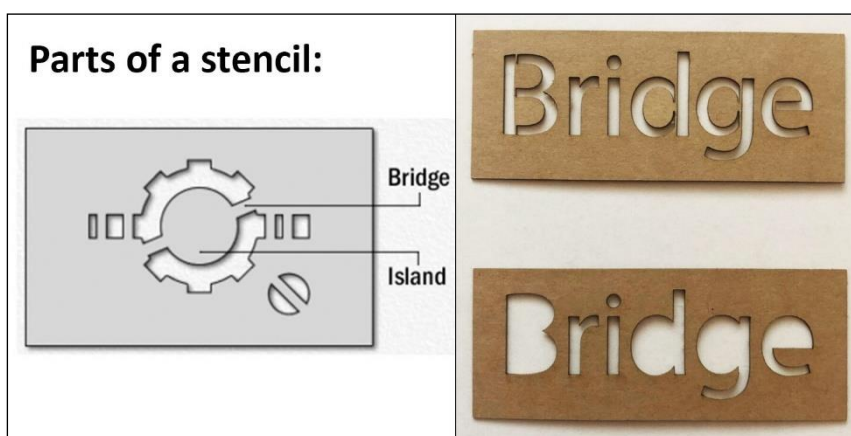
Left: Graphic image showing the parts of a stencil (Vial “Painting Technique: Stencilling”; right: A laser cut showing what happens if a stencil does not contain bridges to secure the islands (Jackforge. “Beginner’s Guide for Laser Cutting Stencils”).
